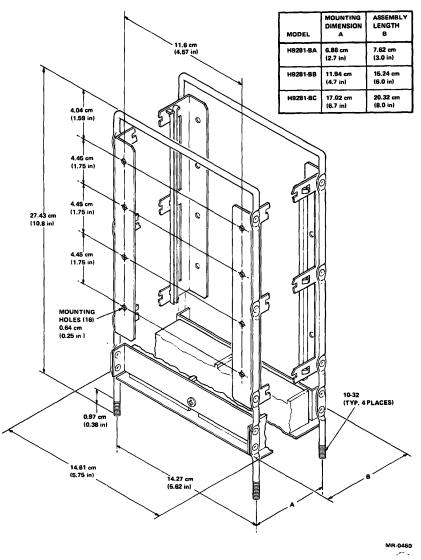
H9281-BA, BB, BC Mounting Dimensions
